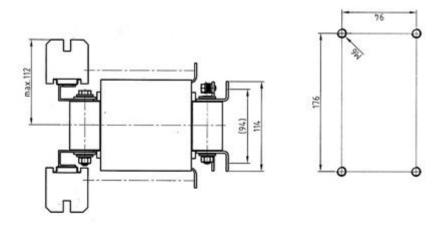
Dimension drawing of line reactor for the Smart Line Module 16 kW
